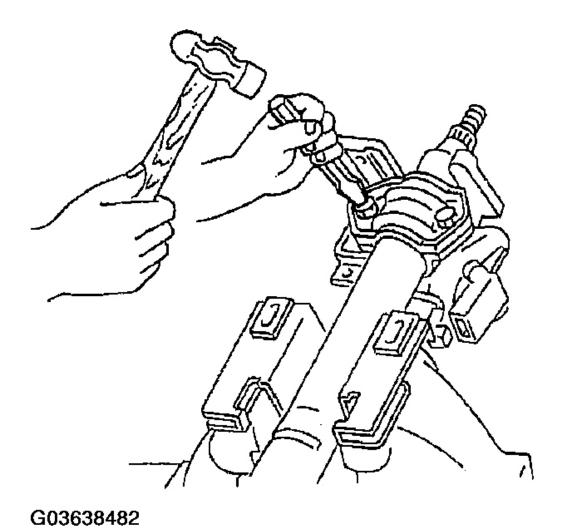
Using Chisel To Make A Groove In Heads Of Steering Lock Mounting Bolts Courtesy of MAZDA MOTORS CORP.
